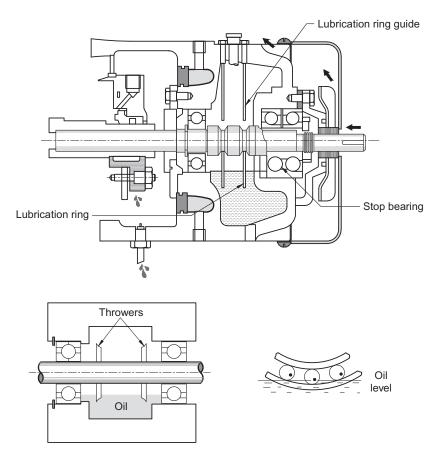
(Top) Schematic of roller ball bearings fitted with splash "oil ring" system; (bottom) cutaway of splash oil ring lubrication.
